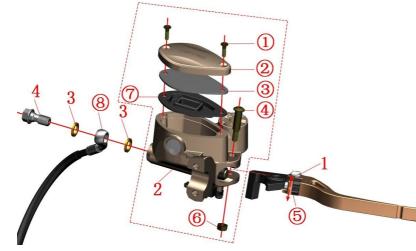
FRONT FORK COMPONENT		Add brake fluid, rocker adjustment	CHK
